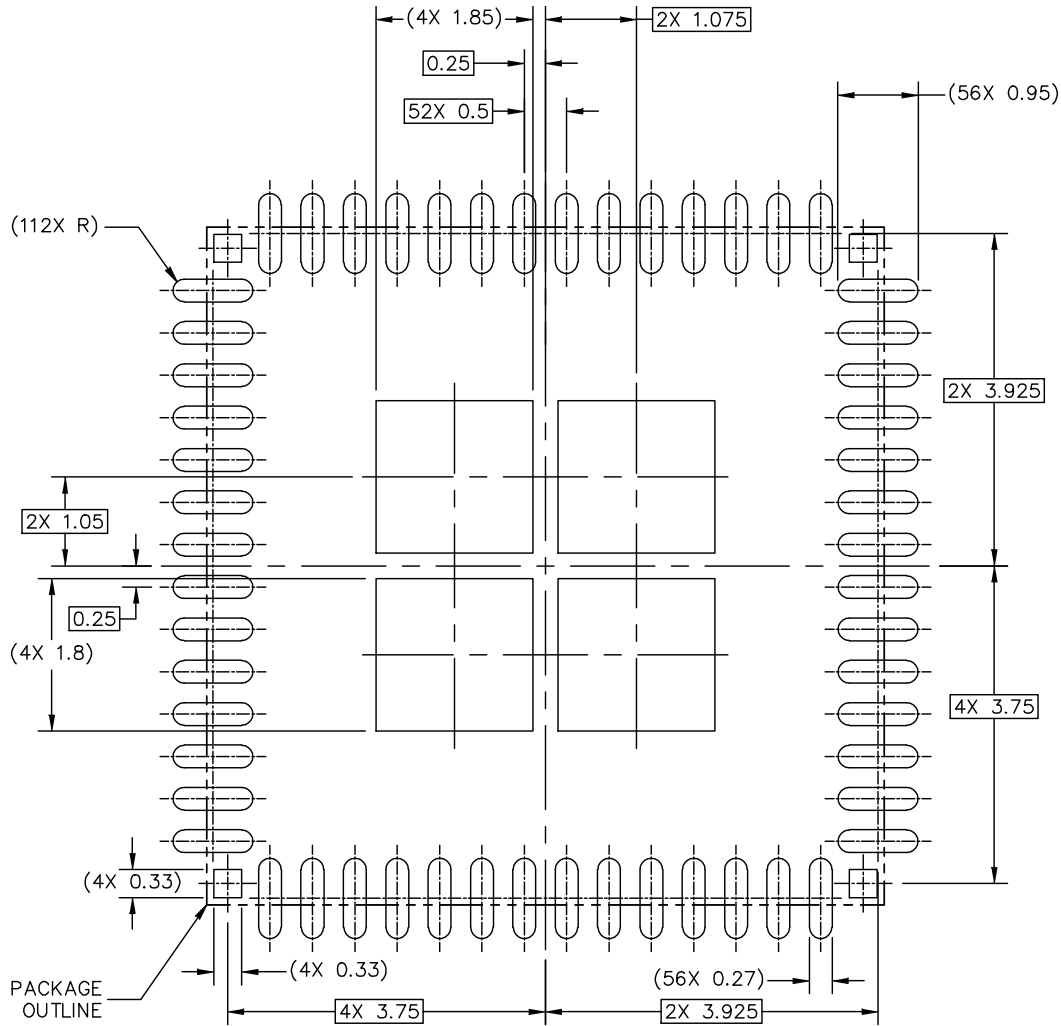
Reflow soldering footprint part2 for HVQFN56 (SOT684-26(SC))
